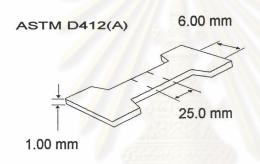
The dimensions of dies for dumb-bell test pieces
